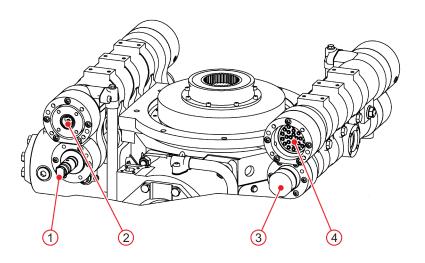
Extracting cooler inserts towards the compression stage 1 cylinder
